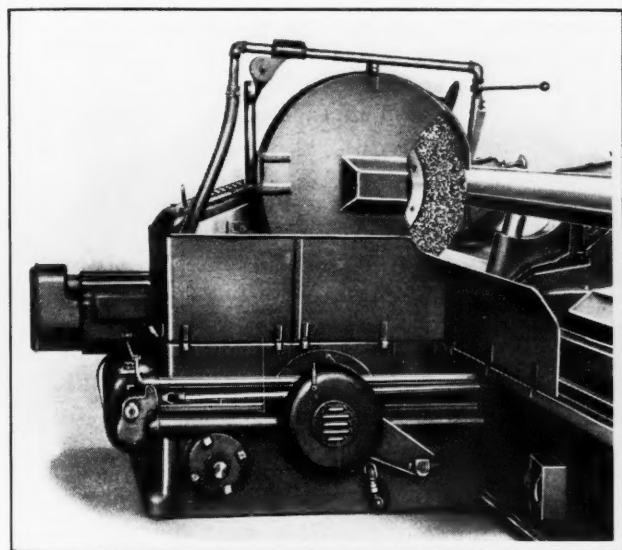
View of Grinding Wheel and Drive to Coolant Pump
